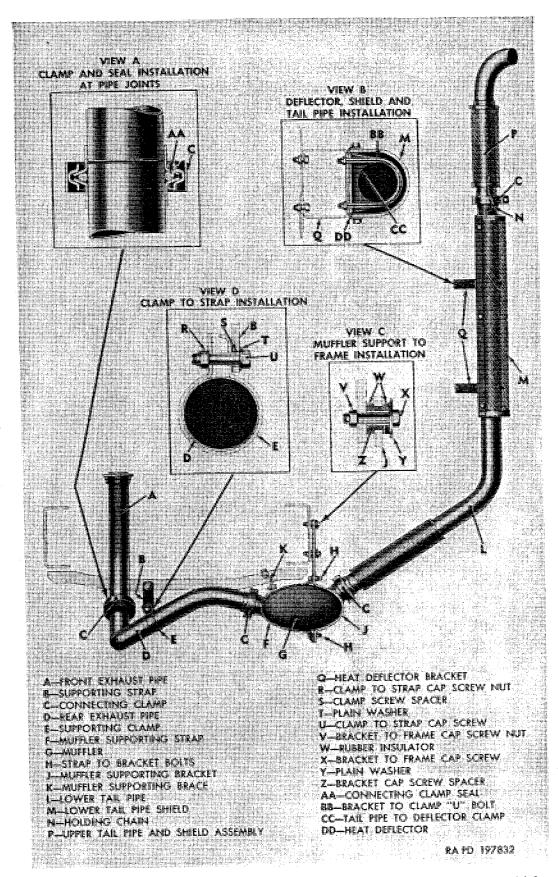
General arrangement of exhaust system—typical of all vehicles, except water tank truck M222.
